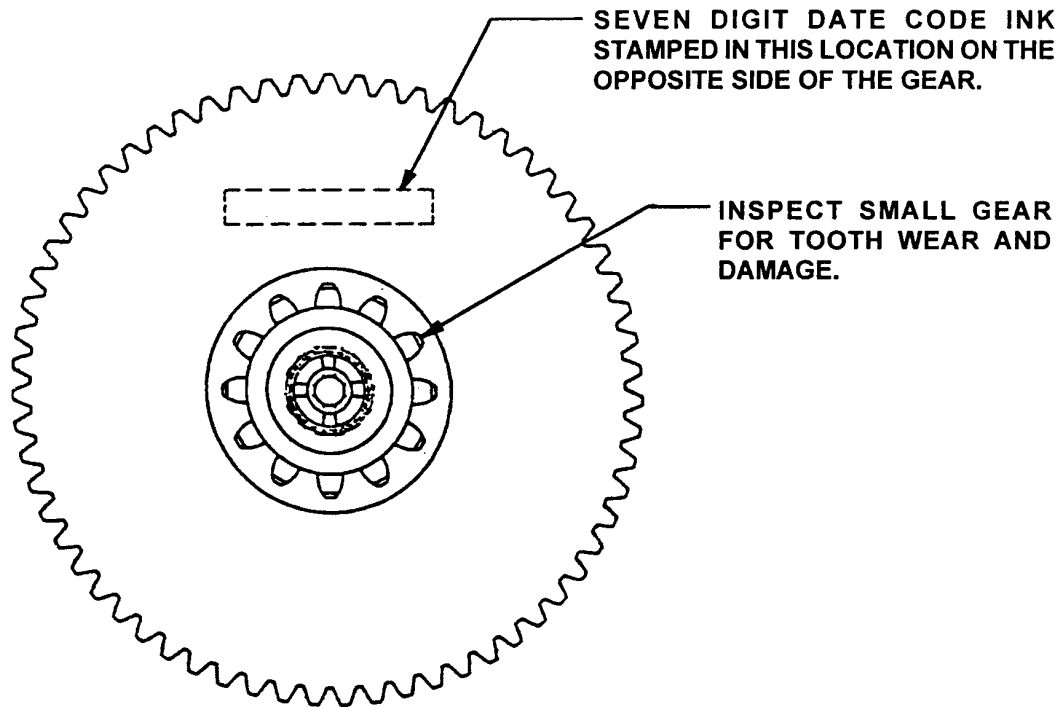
P/N 653575 GEAR AND CLUTCH ASSEMBLY
